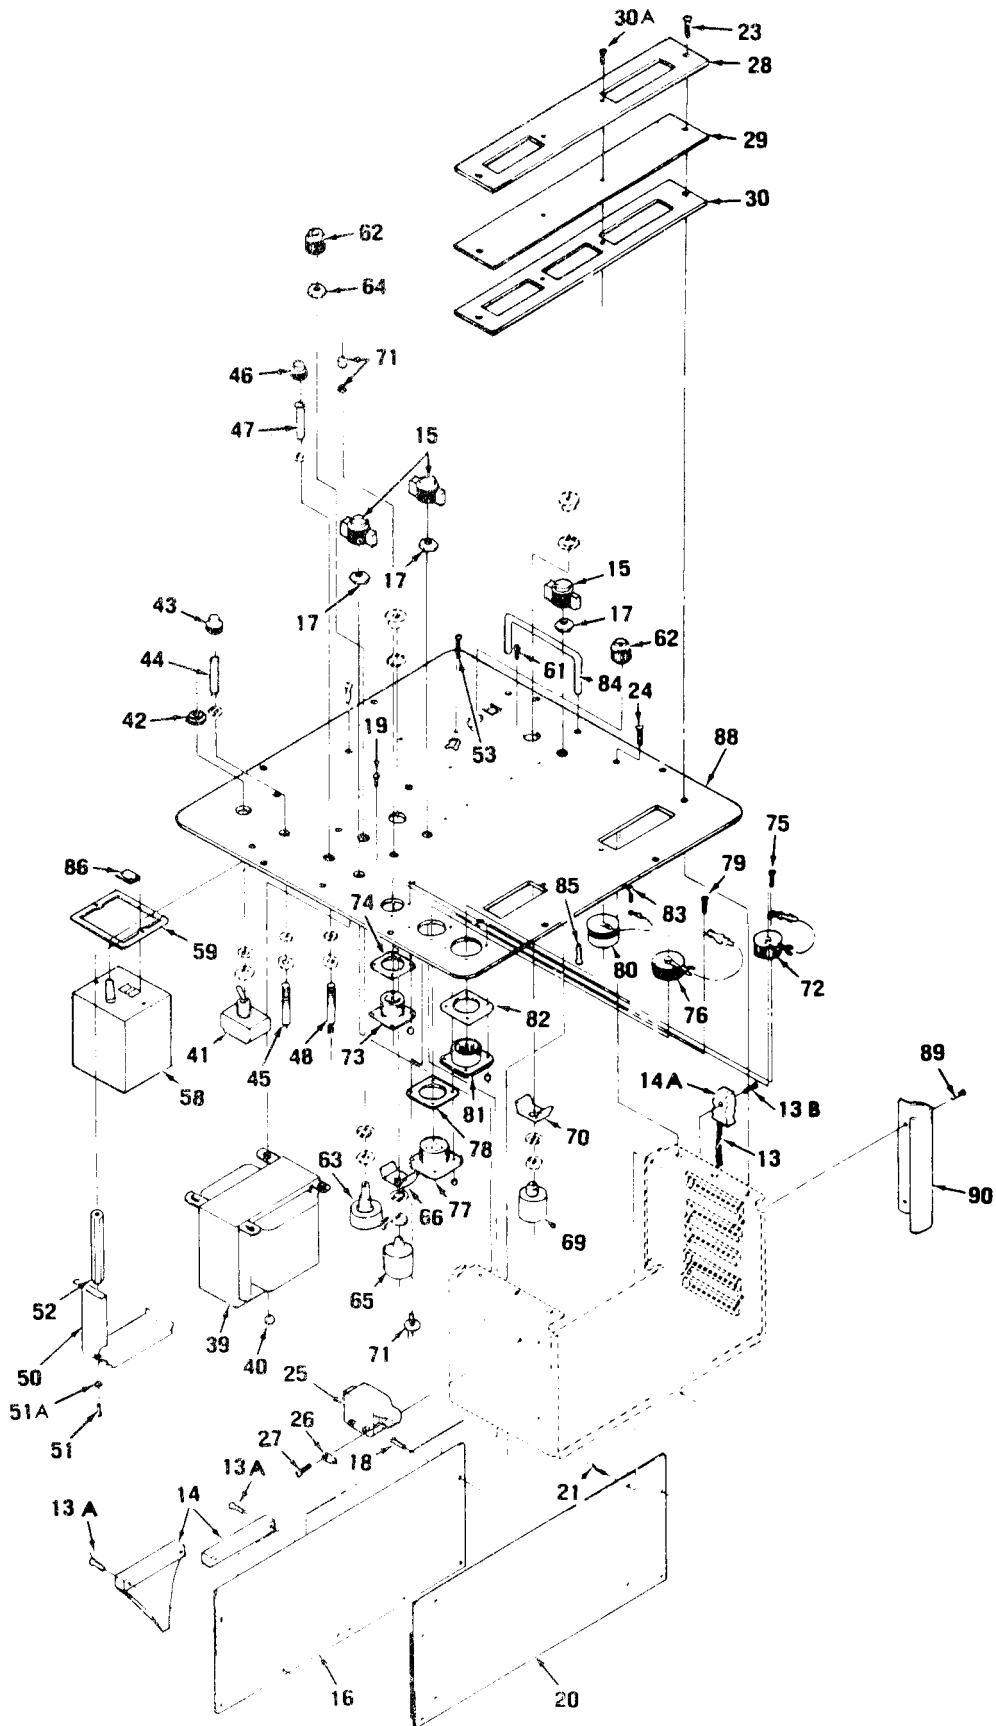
Trimmer Assembly (Sheet 2 of 2)
